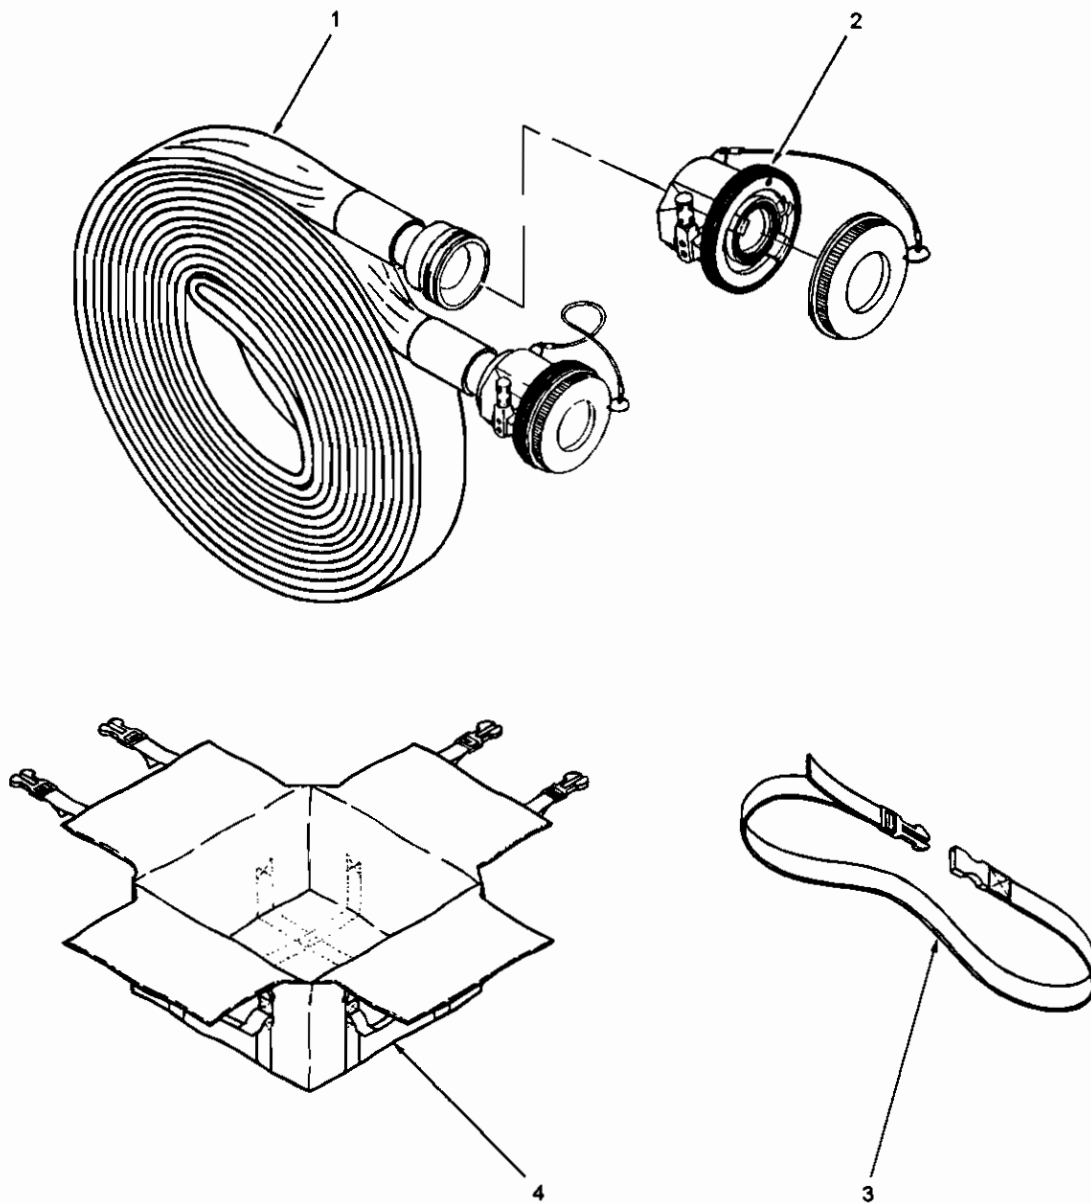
Discharge Hose Kit (P/N 13230E5939)
